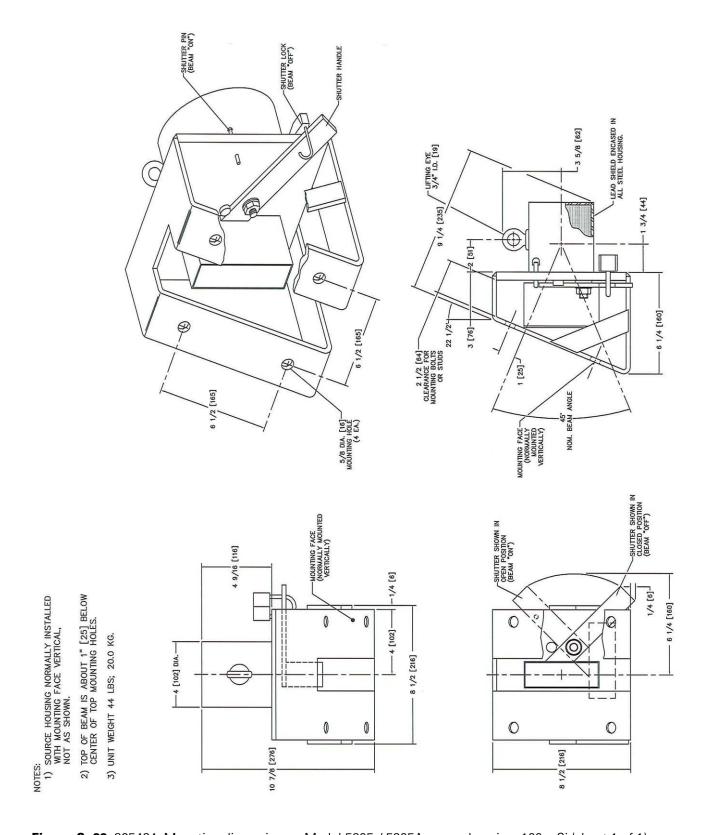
865494: Mounting dimensions – Model 5205 / 5205A source housing, 100 mCi (sheet 1 of 1)
